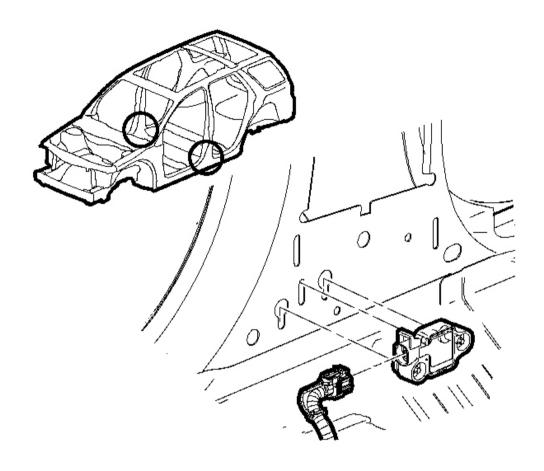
SIS Electrical Connector Courtesy of GENERAL MOTORS CORP.
